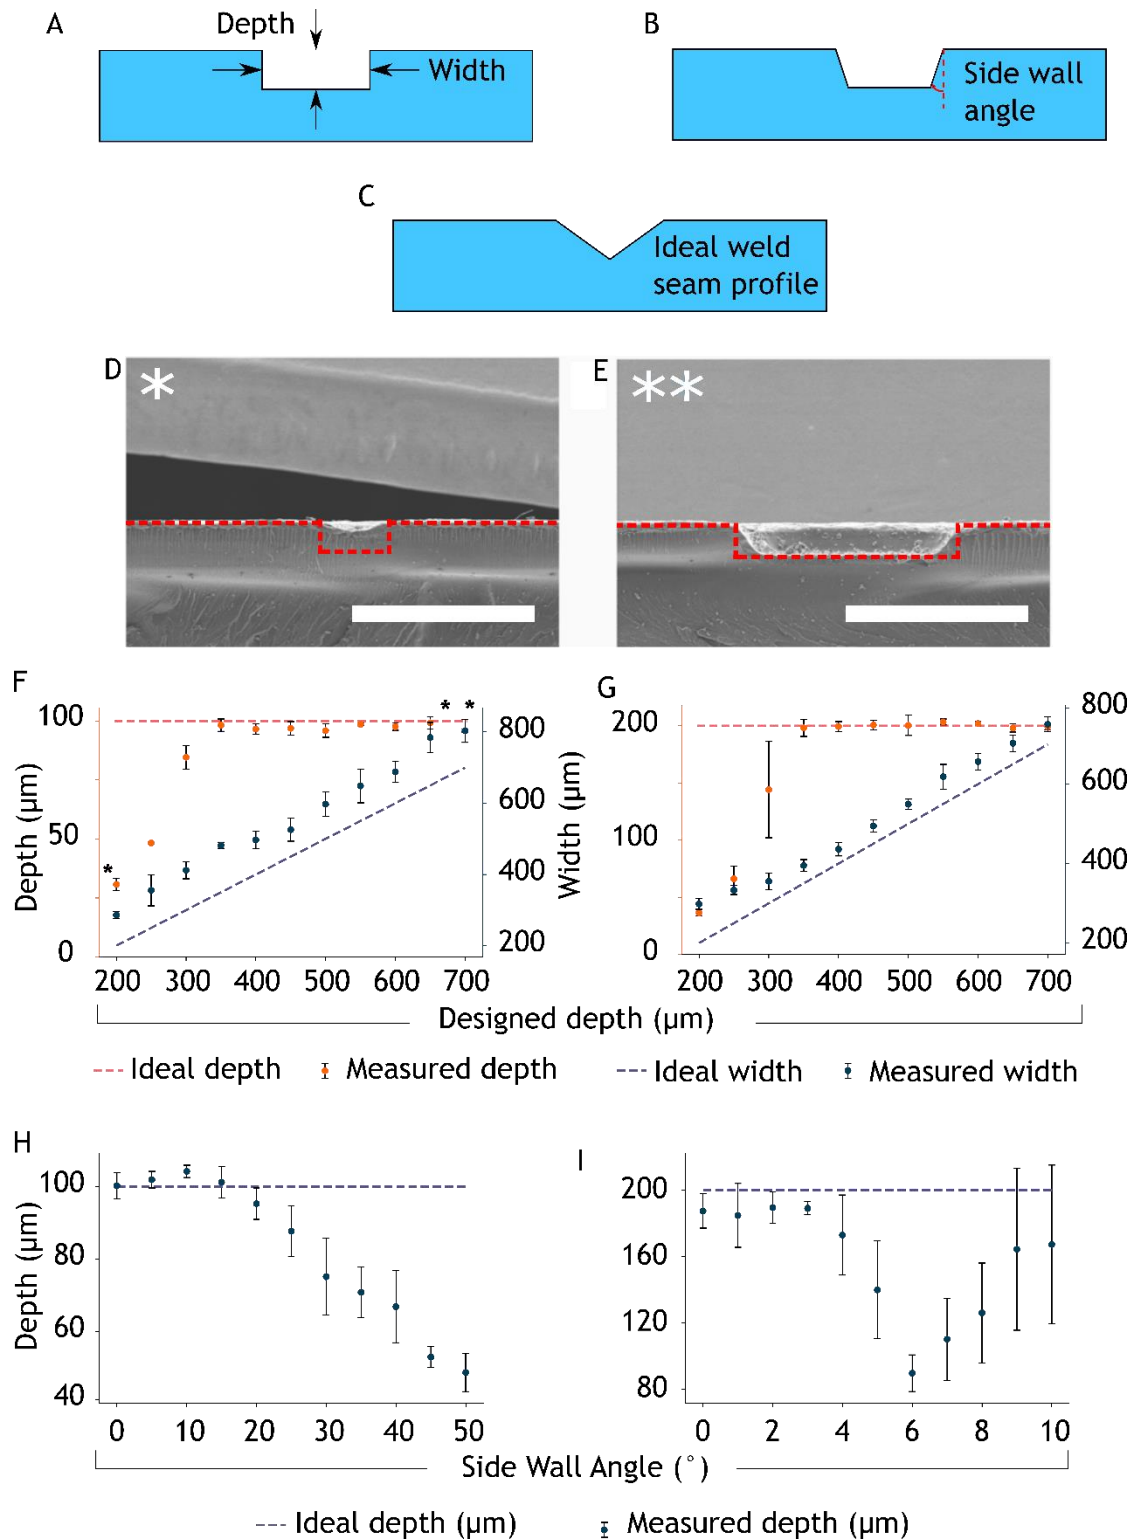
Design of weld seams in 3D printed parts. A shows how the depth and width of the master structures for moulding weld seams from 3D printed masters. B and show how the side wall angle of the feature is defined, while C shows the ideal weld seam profile. D and E show printed trough with designed dimensions of 200 x 100 µm (width x depth) and 700 x 200 µm respectively. Red dotted lines show the designed shape of the trough. Filling in of the feature can be observed in the smaller channel, while the larger one is better realised. F and G show how the designed and the measured dimensions of these features differed from one another for features 100 µm and 200 µm deep respectively. With the full depth of the features only being realised once the width is above 350 µm. The effect on the sidewall angle on the depth of the channels in shown in H shows how the side wall angle of these features affects the depth of a 100 µm through. I shows the same as F but for a 200 µm trough. Scale bars = 500 µm. All points = mean ± standard deviation with n = 3.
